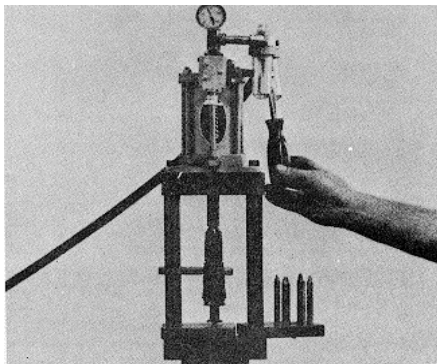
, F60235. Adjusting air pressure on ST-1298
